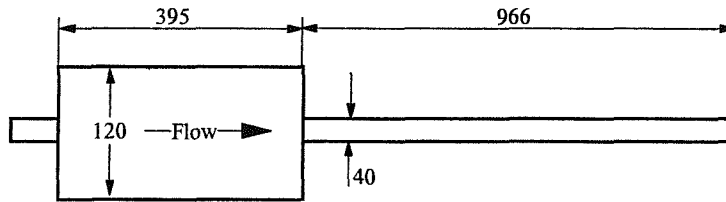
Details of the simple expansion chamber and tail-pipe (all dimensions in millimetres).
